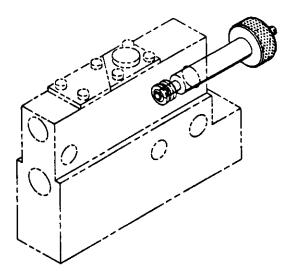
Removal of Seat, Part No. 42576. Using Assembly Aid Tool, T42550-3
